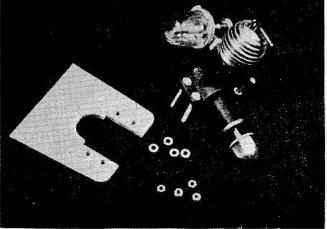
Trim the engine mounting plate to fit the engine to be used and drill mounting holes accurately.
